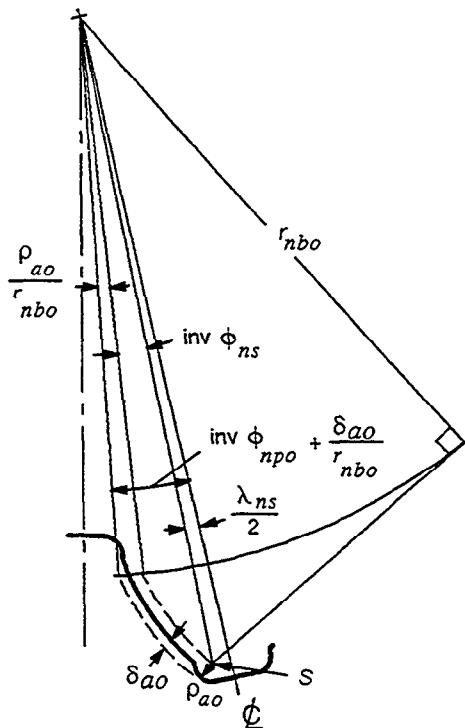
Angle to Center, S, of Tool Tip Radius (Effective Cutter)
